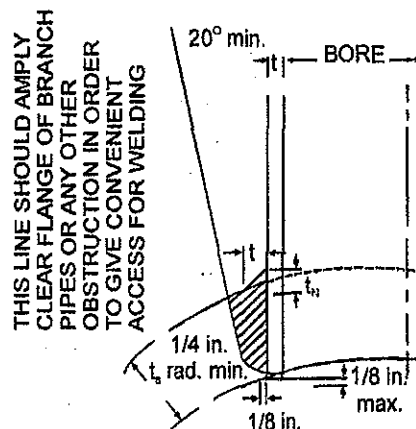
E — WELDED IN STANDPIPE OR BRANCH
